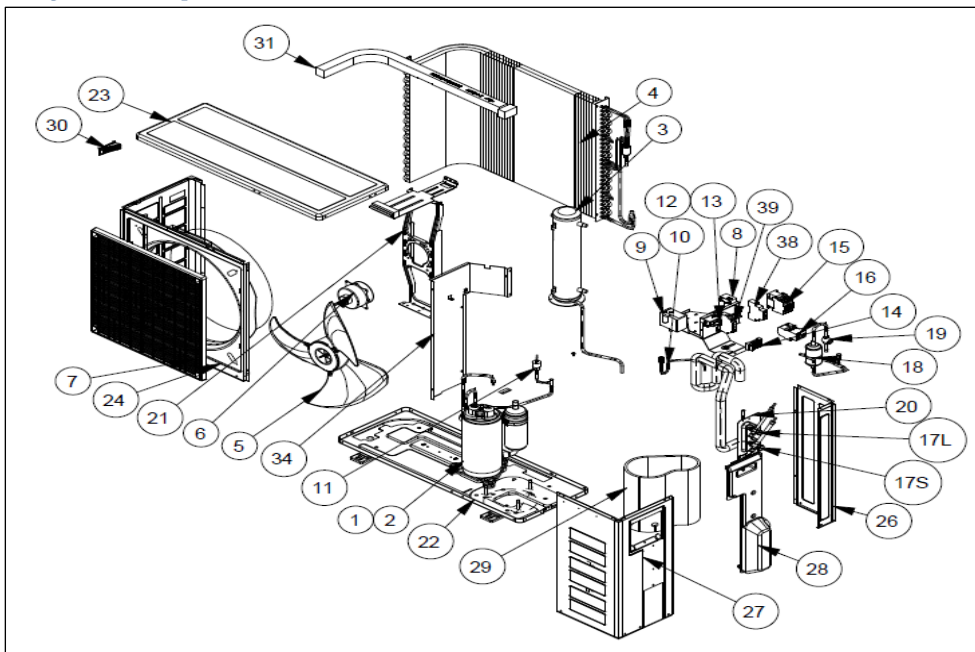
Exploded View LRMS0400FXY1; LRMS0500FXY1; LRMS0600FXY1
